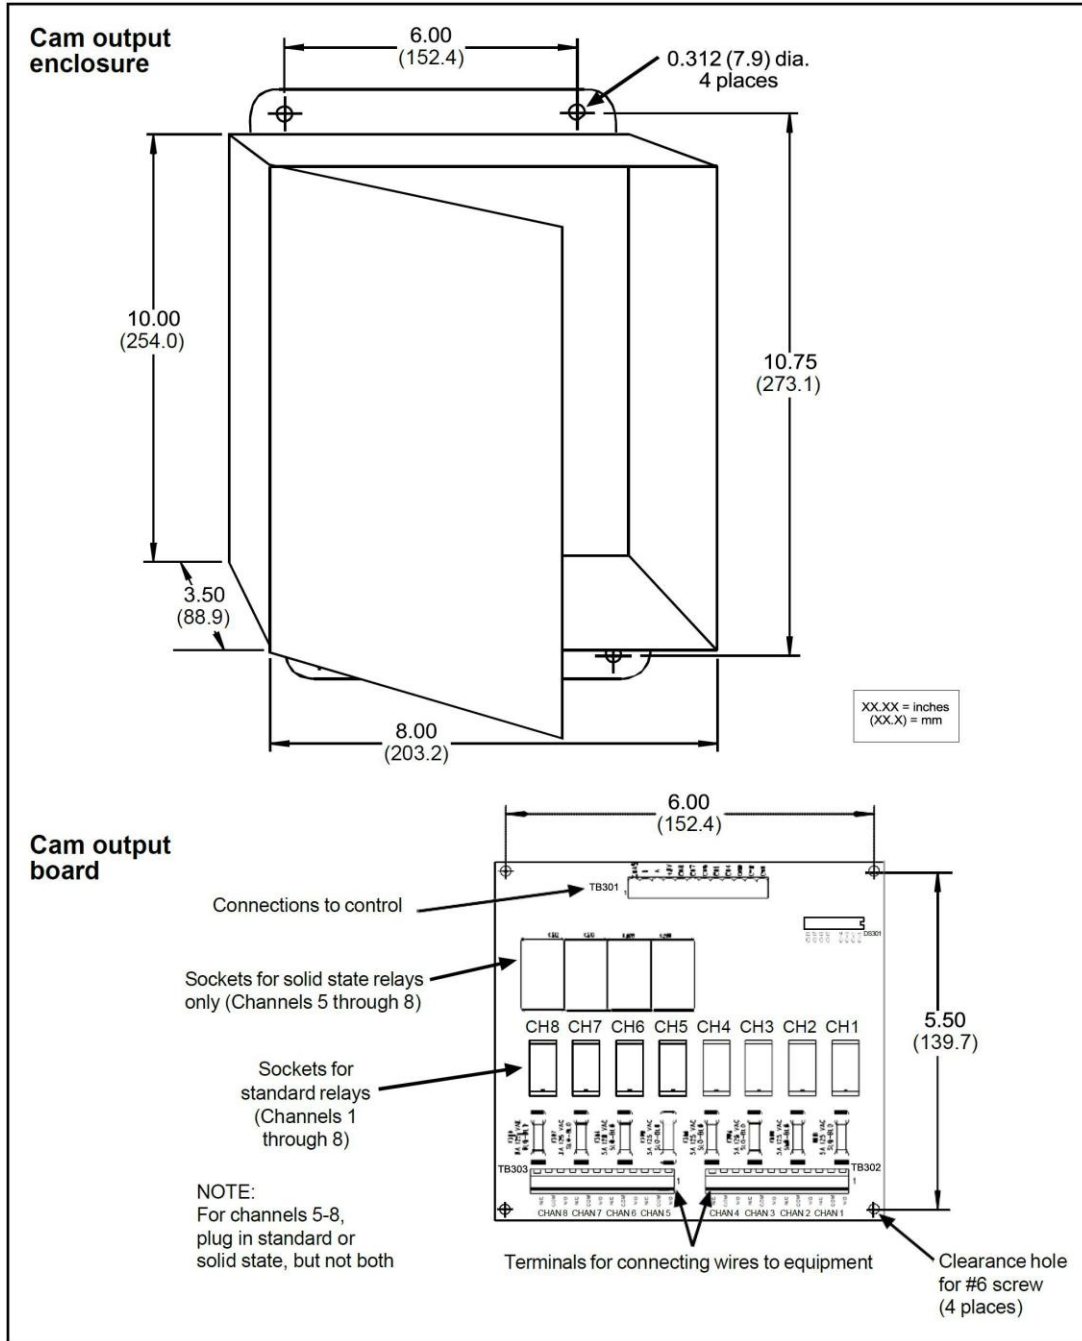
Cam Output Enclosure and Board: Mounting Dimensions
